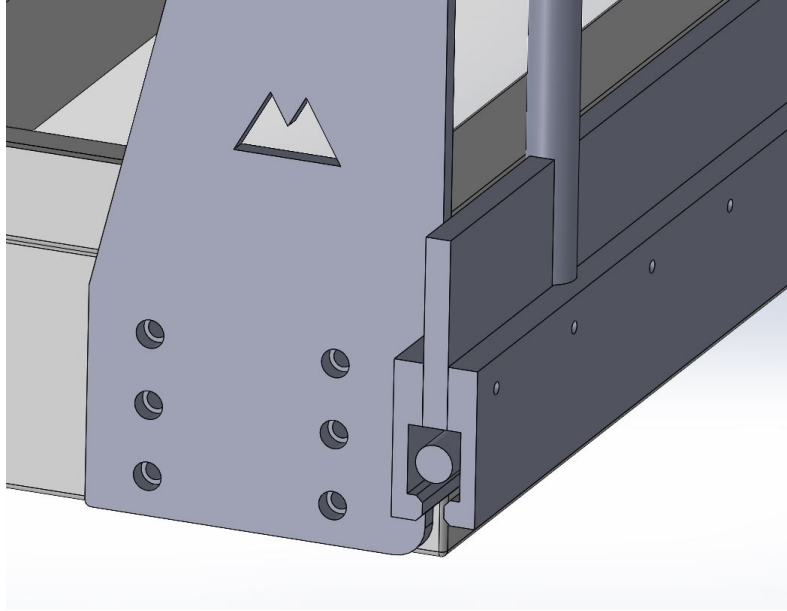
Membrane clamping system with the trapezium threaded rod ascending to the frame
